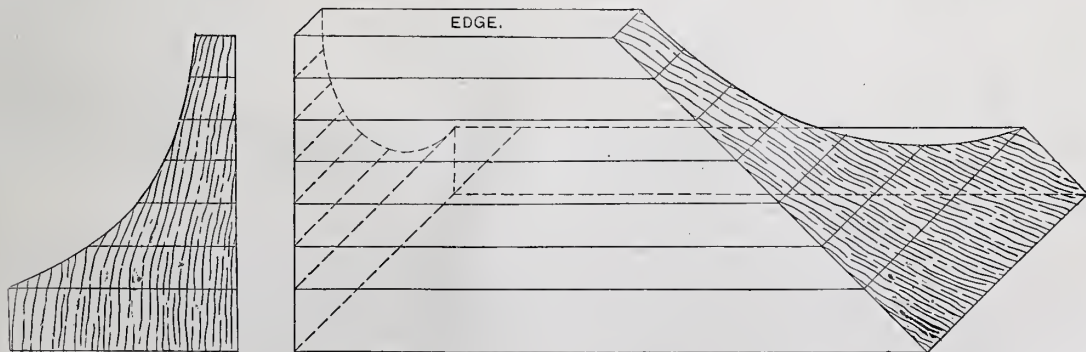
Sketch of a Cove Molding Cut to Illustrate the Foregoing.
